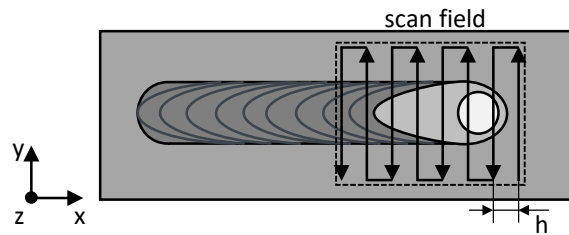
Schematic top-view illustration of a laser beam welding process, with the meander shaped scan field surrounded by the dotted black rectangle and the hatch distance h .
